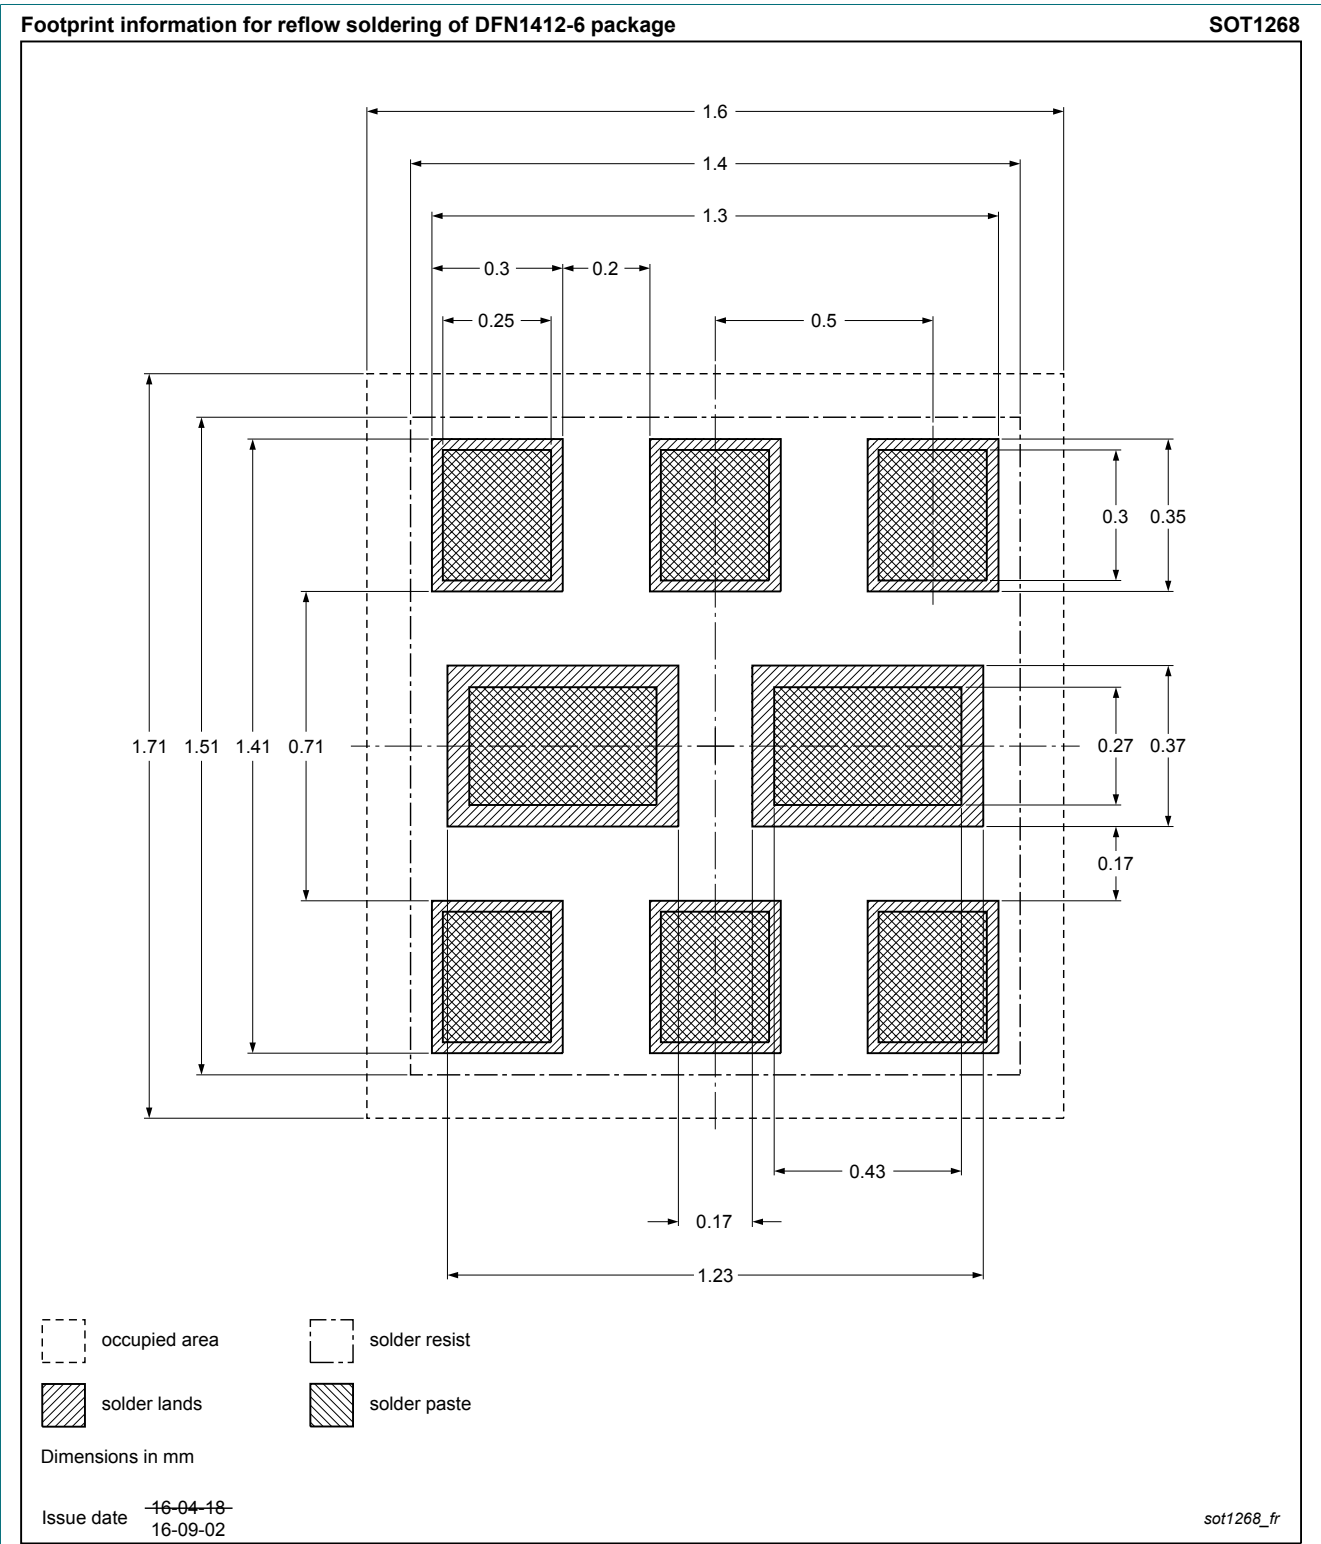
Reflow soldering footprint for DFN1412-6 (SOT1268)
